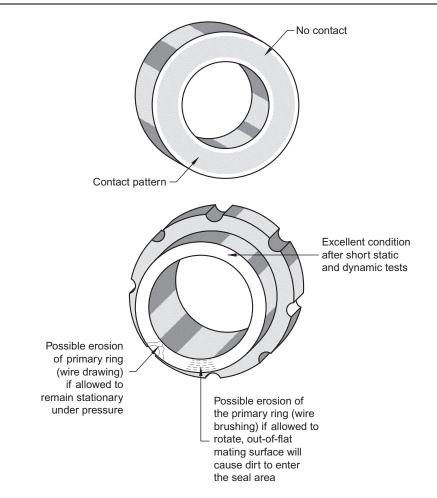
Mechanical seal contact pattern due to mechanical distortion.
